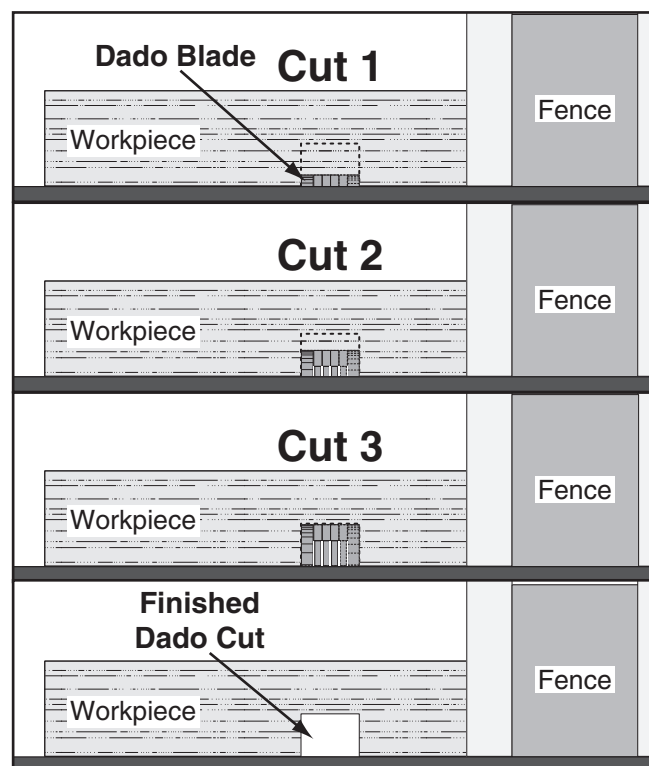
Example of dado being cut with multiple light cuts, instead of one deep cut.
